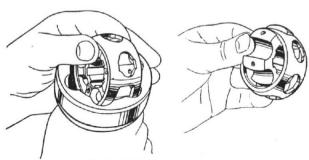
REMOVING CAGE-RZEPPA JOINT
